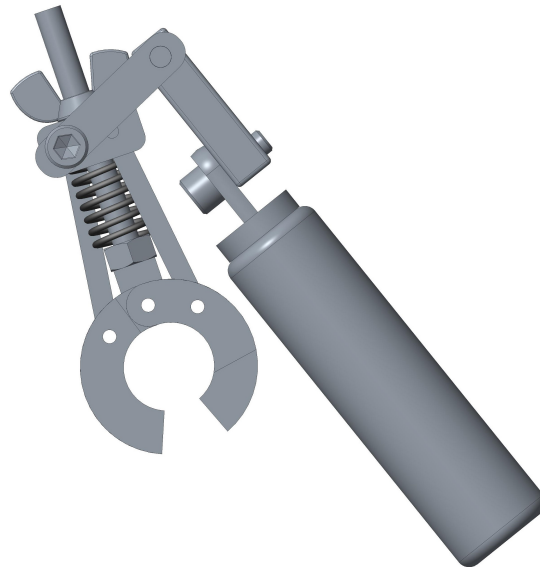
Handle on the pen holder mechanism. The 3-adjustment links are shown.
